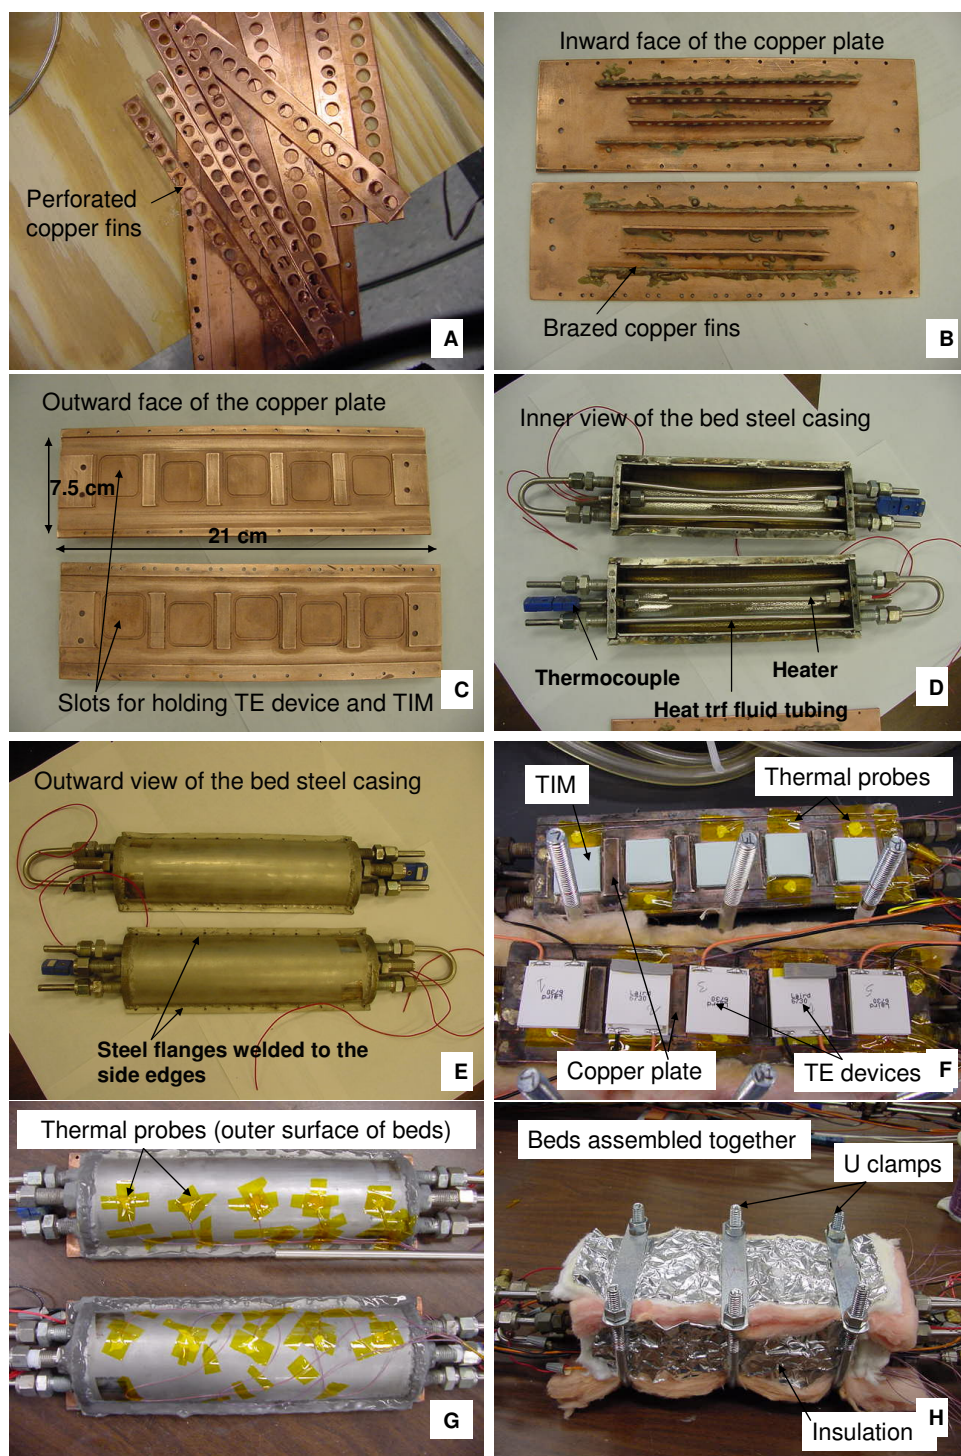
Adsorbent bed assembly. (A) Perforated copper fins, (B) Copper fins brazed to copper plate, (C) Other side of copper plate showing slots for TE device, (D) Bed casing showing the tubes, thermal probe and heater, (E) Outer view of bed casing, (F) Bed copper plate with TIM (Thermal Interface Material) and TE devices, (G) Outer face of bed casing, showing the thermal probes, (H) Assembled beds heavily insulated.
